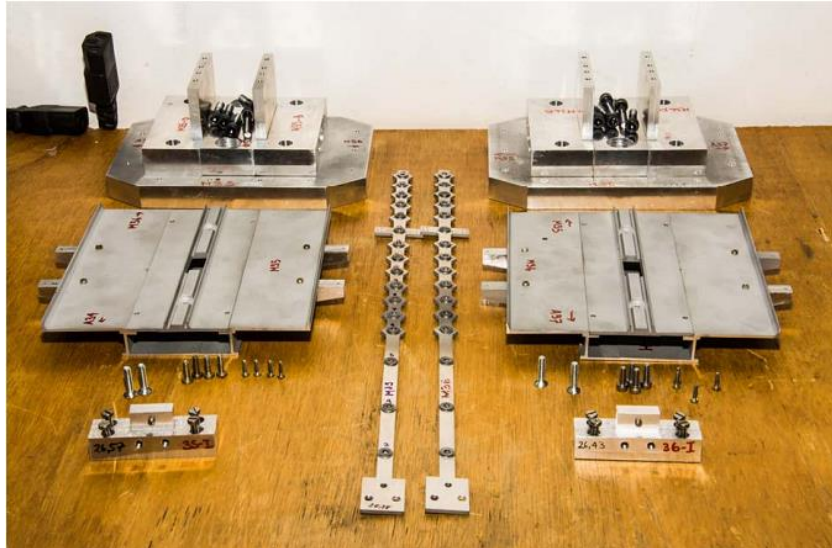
Component parts of the bridge model deck, foundation blocks and towers [4].
